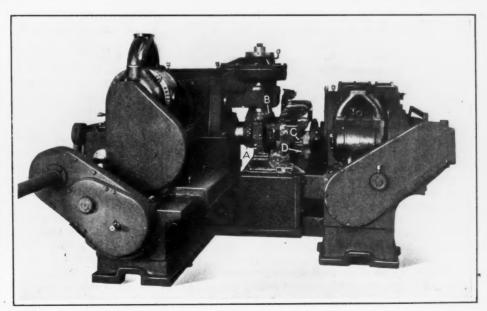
Machine for milling the Rear End, Cover Pad, and Bell Housing End of a Transmission Case
